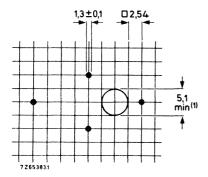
Hole pattern for mounting on a printed-wiring board.
